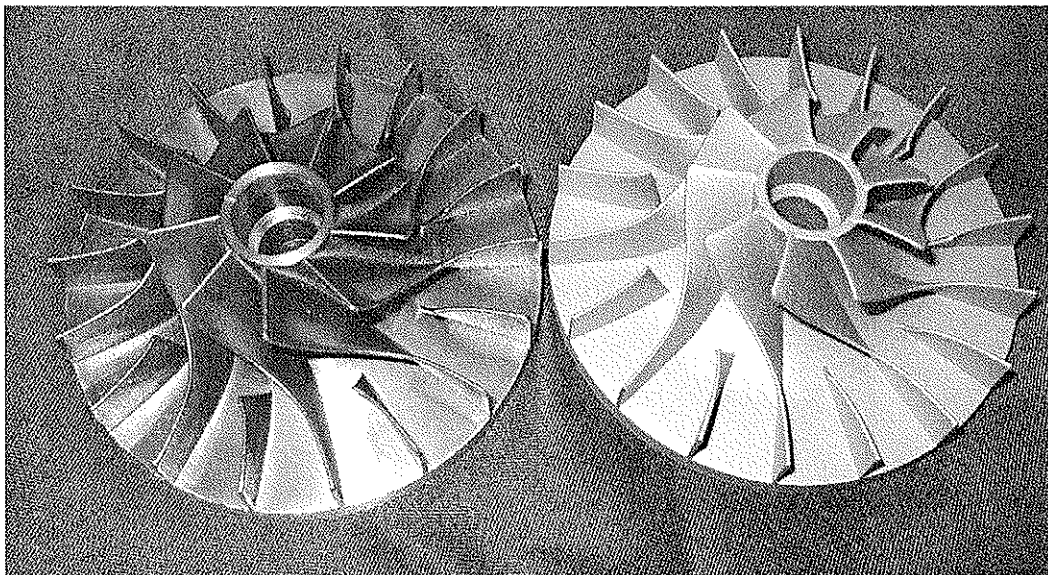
Demonstration impellers with LC IN-718 blades built on pre-machined substrates. Left one in as-consolidated condition; Right one after sand blasting.
